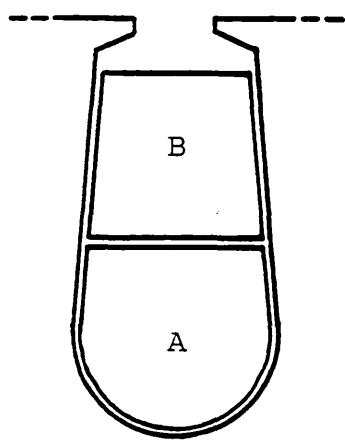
STATOR SLOT OF THE EXPERIMENTAL COIL PAIR MOTOR
